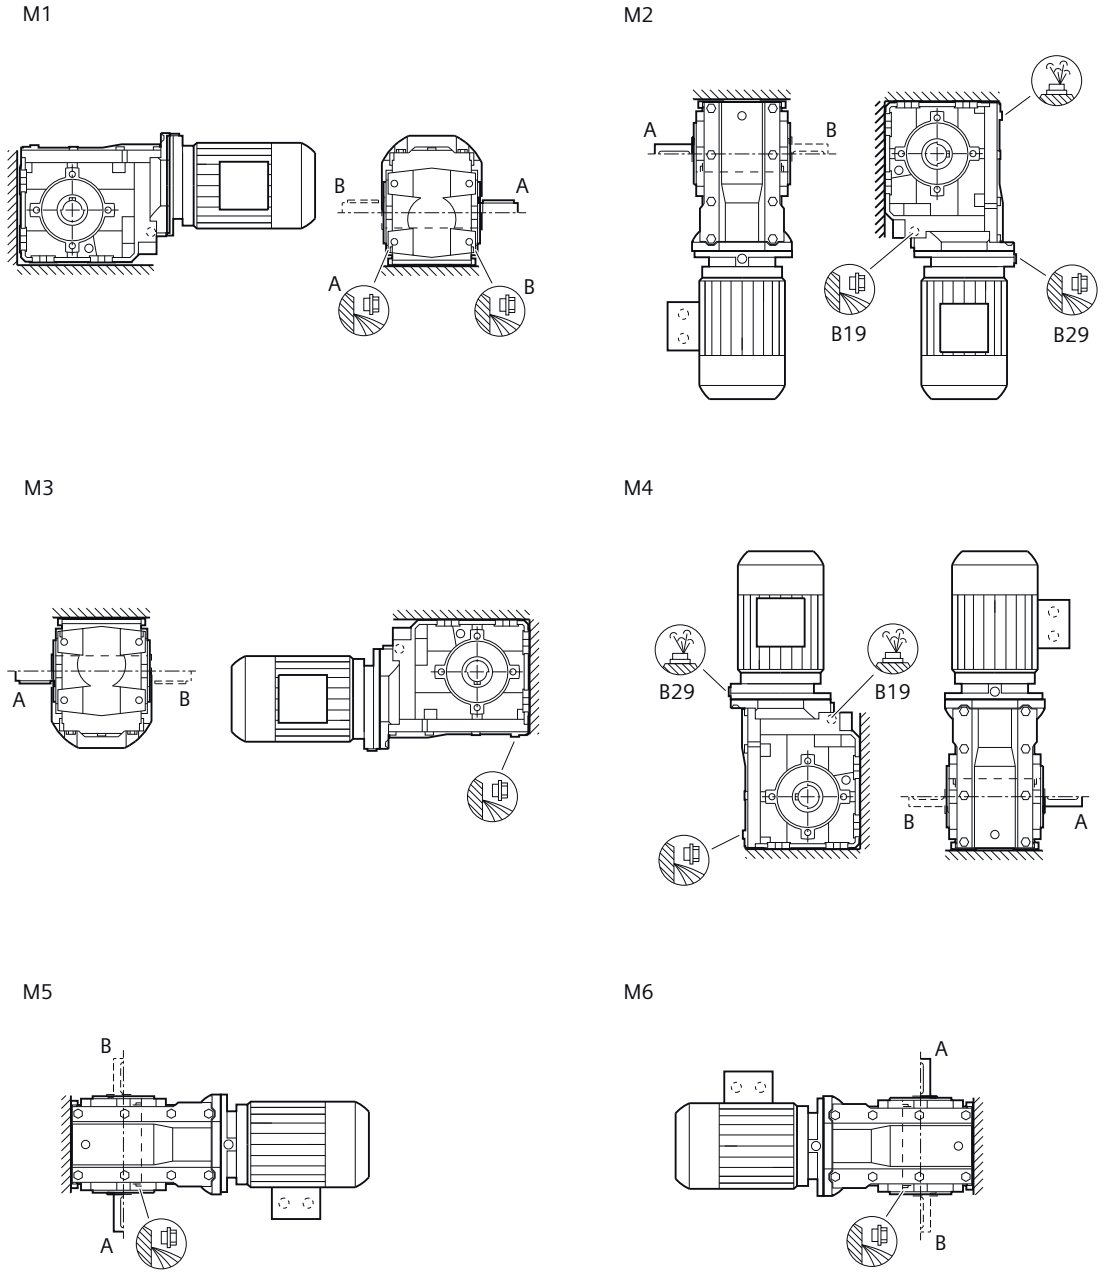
Mounting positions for bevel gearbox B foot-mounted design, sizes 19 - 29
